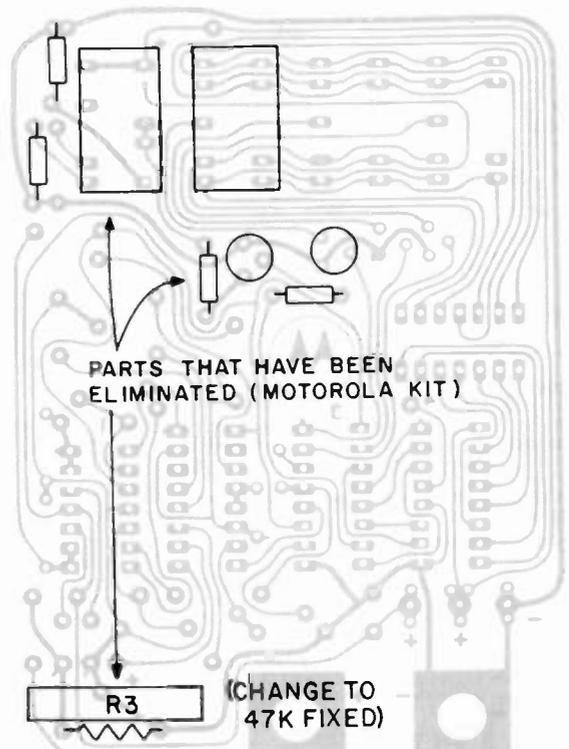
(b). Component side of the Motorola board showing which parts are not used.
